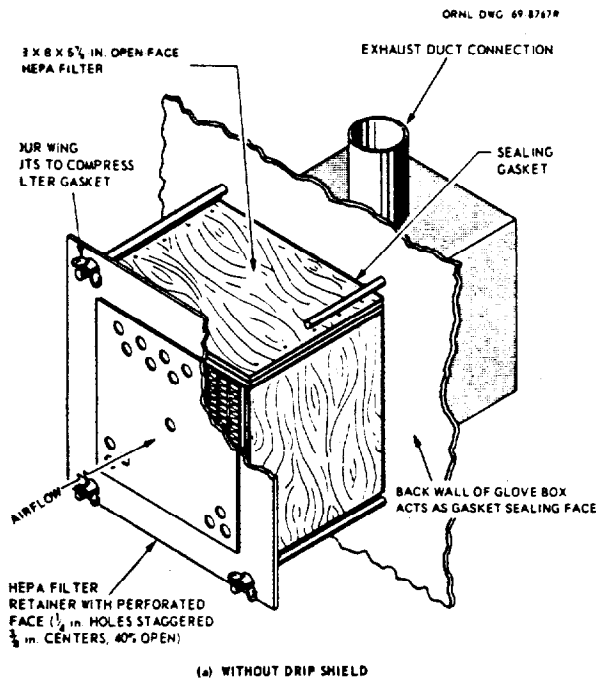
Recommended methods for mounting open-face HEPA exhaust filter inside glove box (in-box).
